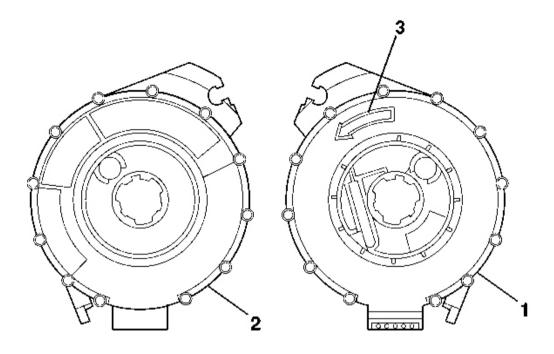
SIR Coil & No Centering Window, No Spring Service Lock Courtesy of GENERAL MOTORS CORP.
